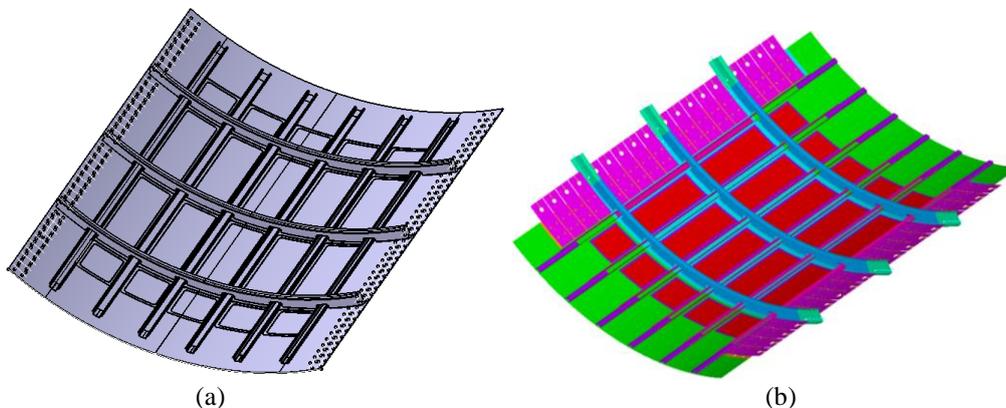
CAD drawing of 2nd modified panel design, provided by HAI (a), FE model in ANSYS APDL (b)
